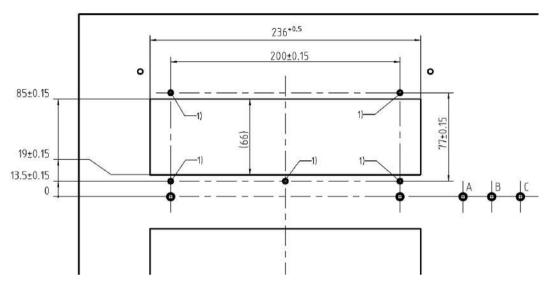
Section from the drilling pattern and installation cut-out for the external fan unit
